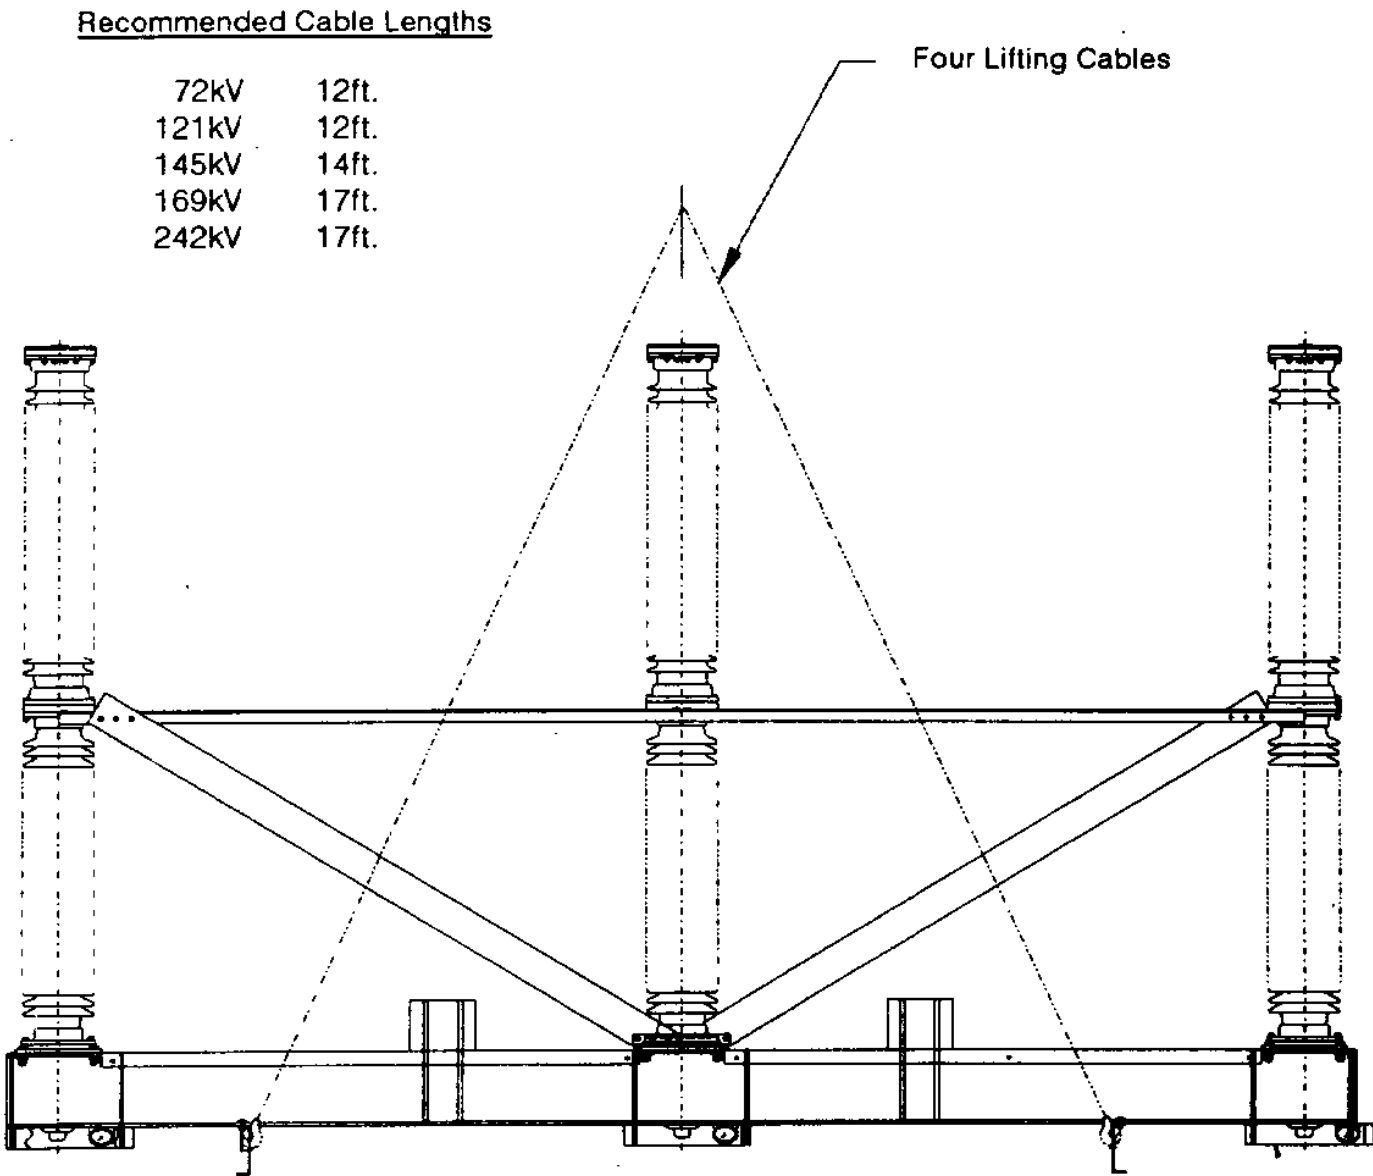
Lifting the 3-Pole Shipping Assembly
